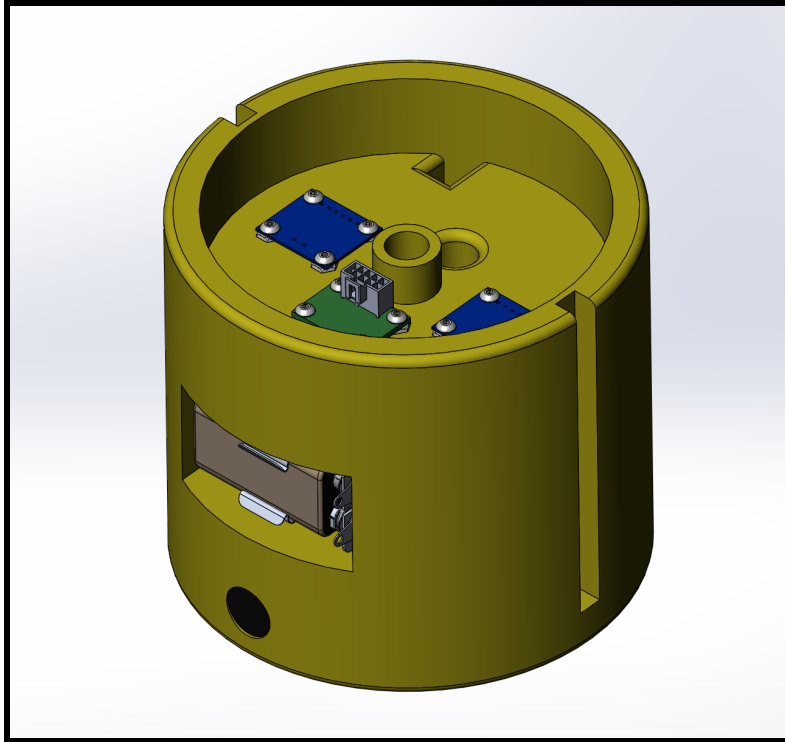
Avionics Section Avionics Assembly Isometric Bottom View
